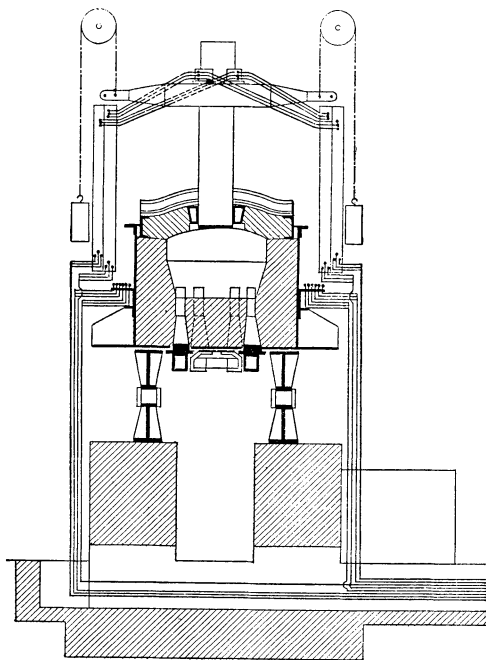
Elevation of 2.5-ton, single-phase Girod steel furnace showing arrangement of conductors.
